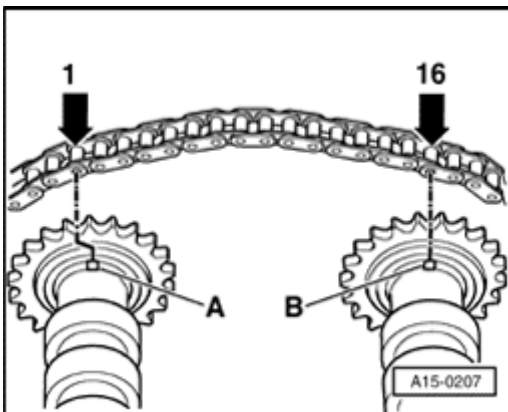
First And Sixteenth Drive Chain Rollers Installed On Chain Gears
